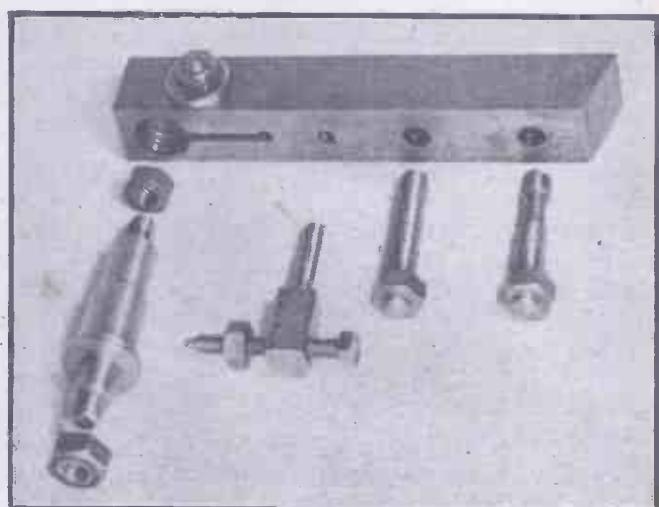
Gear-cutting rig disassembled, showing component parts.
